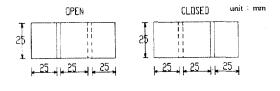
Cutting method of veneer for lathe check test and plywood.
